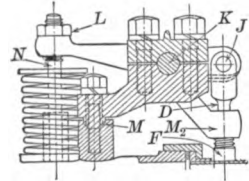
DETAIL OF VALVE-ROCKER SUPPORT, TO LESSEN EFFECTS OF EXPANSION
